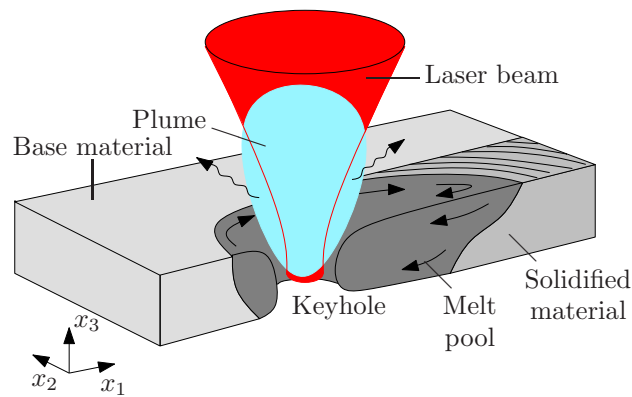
Schematic cross section of the full penetration keyhole laser welding process of a thin sheet.
